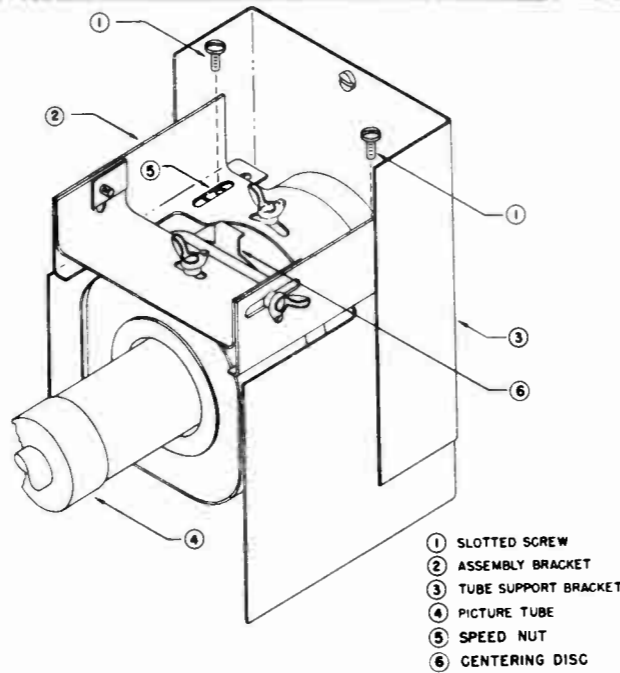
DEFLECTION YOKE AND FOCUS COIL ASSEMBLY
